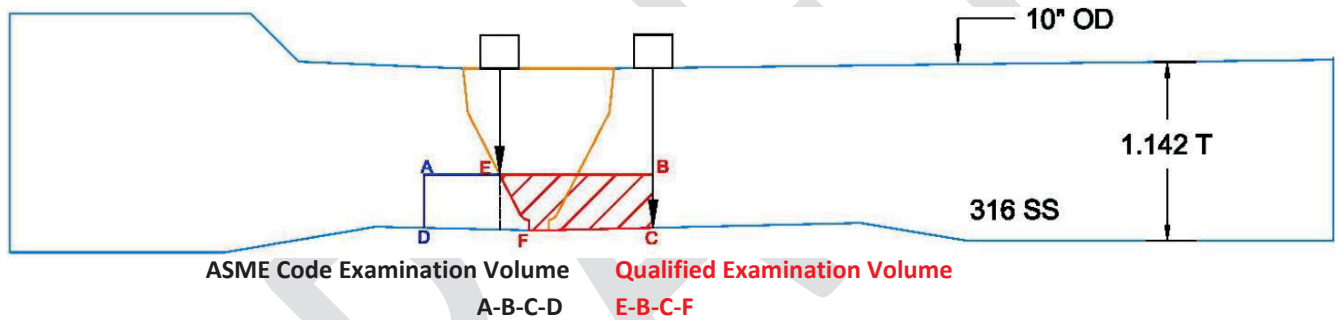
Weld Representing Austenitic Valve to Pipe Welds (Tapered) - Alternative Request Qualified Examination Volume for Axially Oriented Flaws
